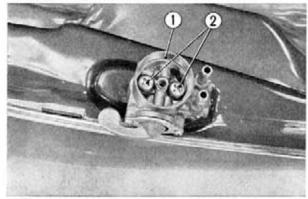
① Fuel valve ② Fuel valve mounting screws
